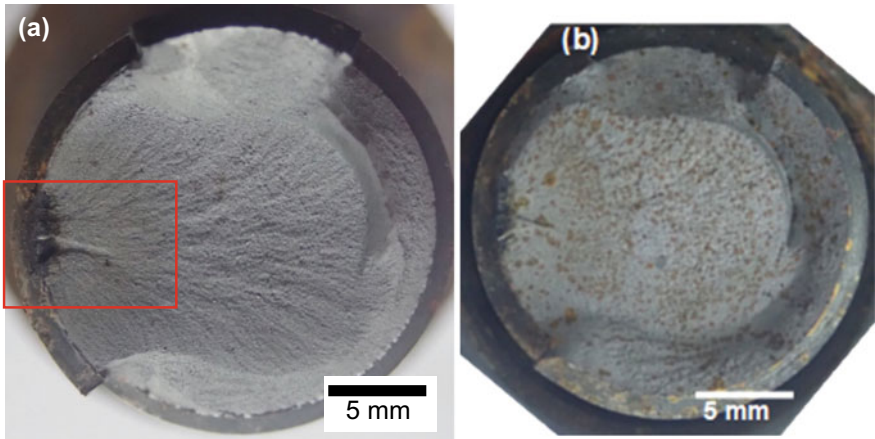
(a) Optical micrograph of the entire fracture surface and (b) the pair fracture surface of (a) (Homma et al. [5])
